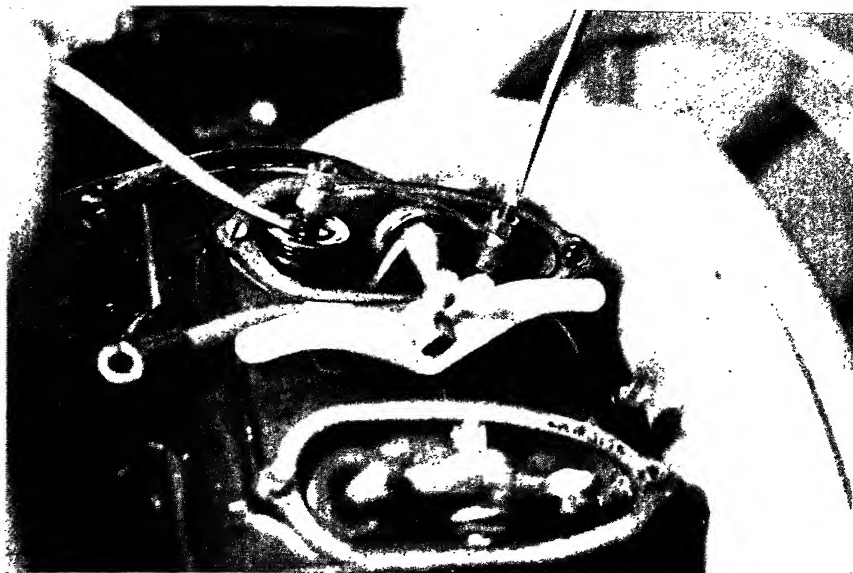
CHECK TAPPET CLEARANCES AND ADJUST IF REQUIRED
